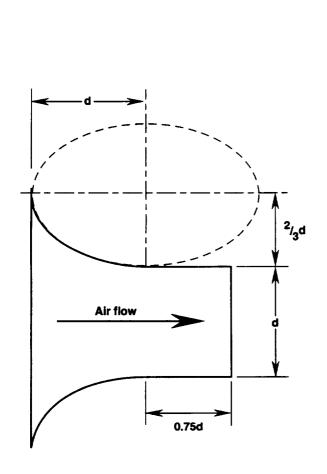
American Society of Mechanical Engineers (ASME) long-radius nozzle definition.
